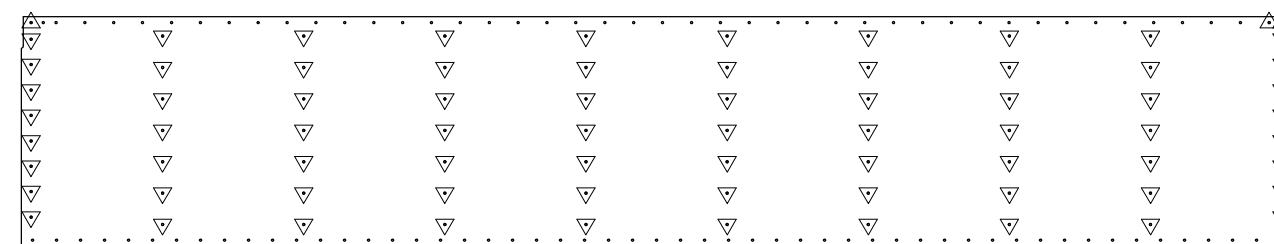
A-1002-1 BOTTOM SKIN RIVETS
